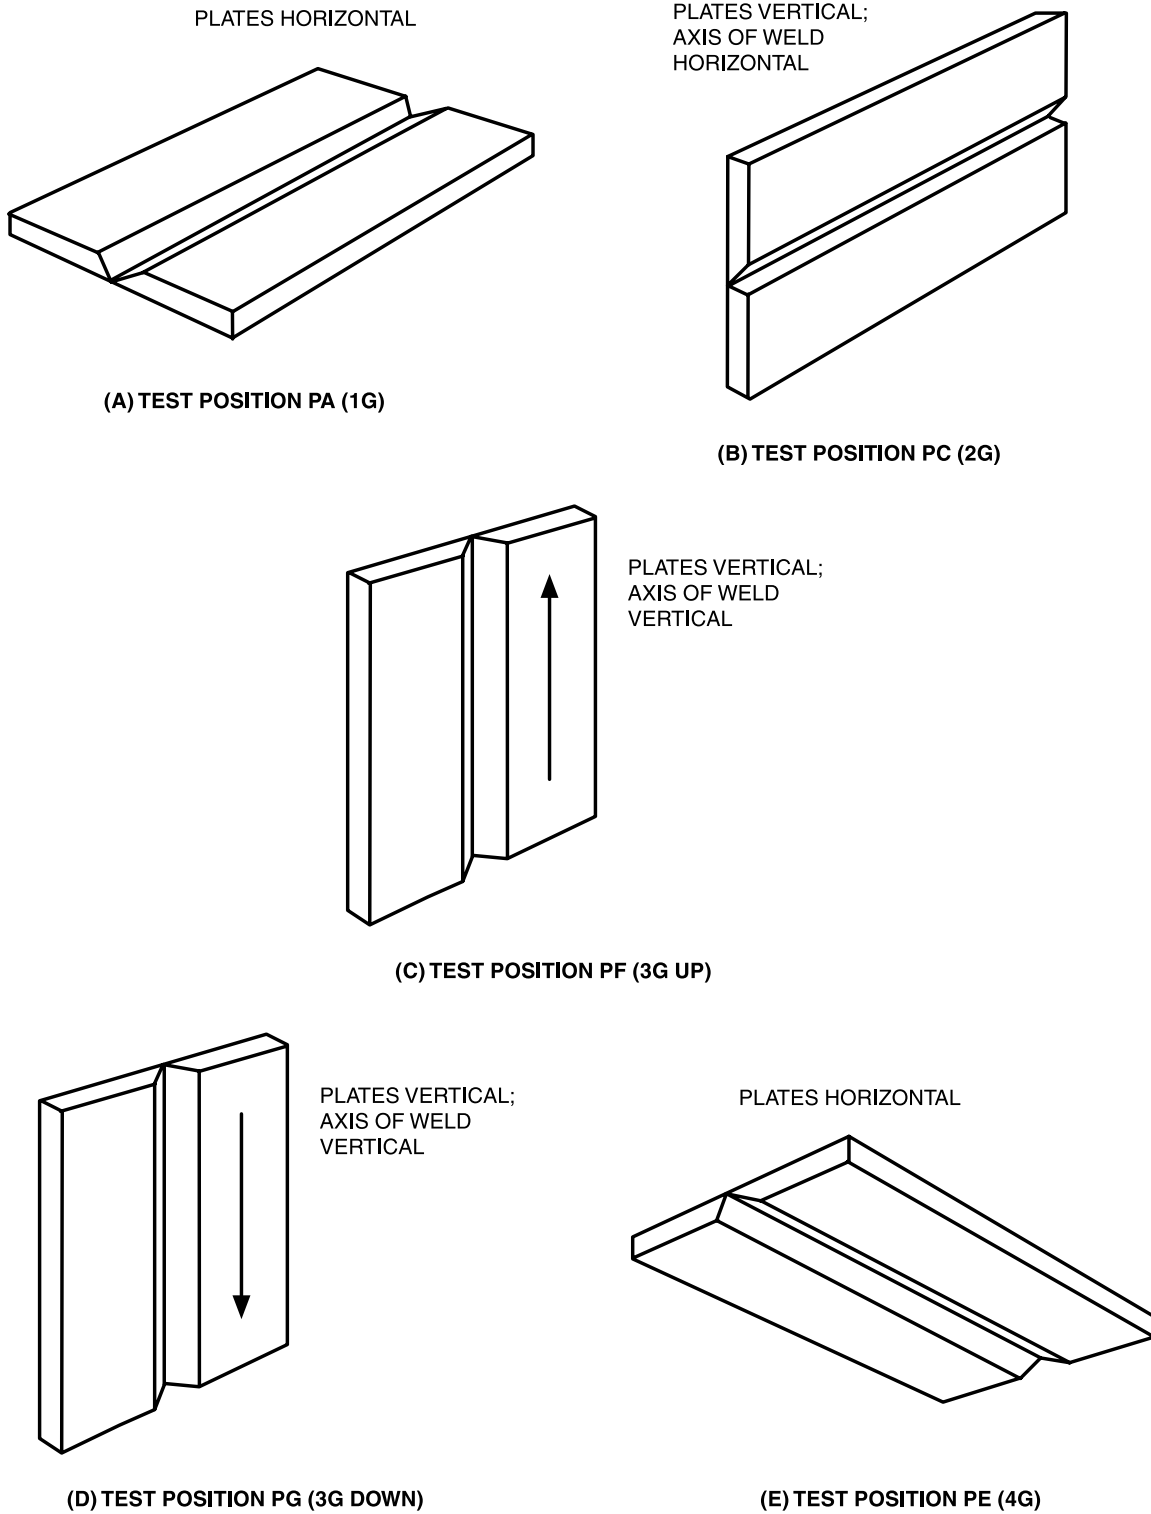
Welding Test Positions for Groove Welds in Plate
